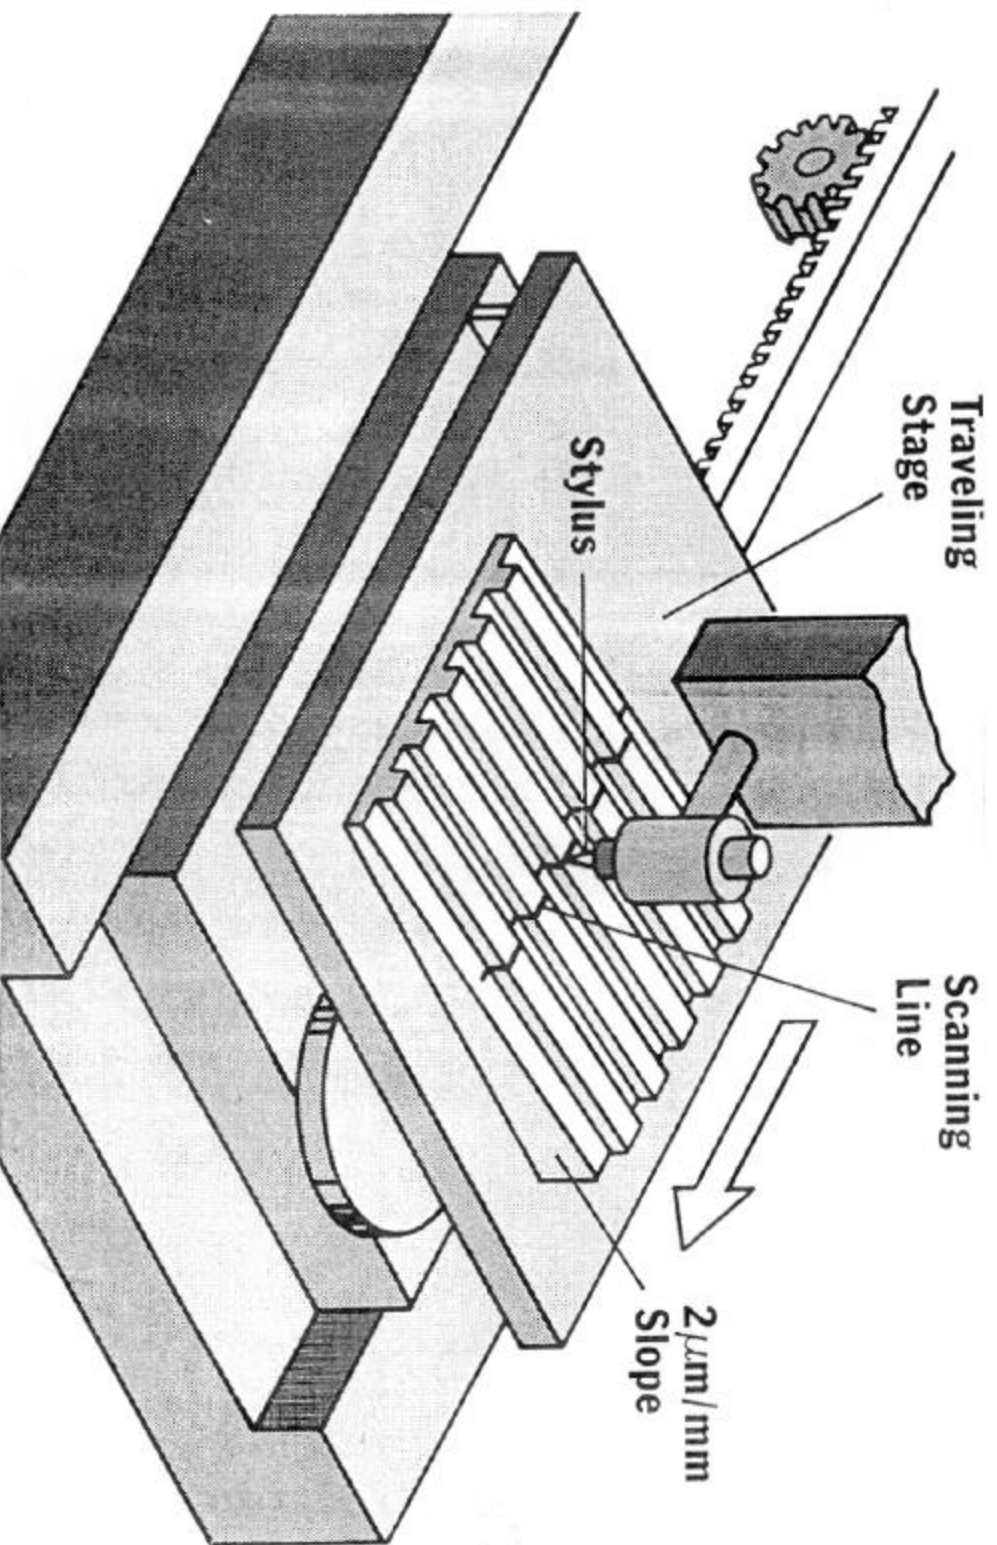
Schematic drawing of a surface profilometer. Courtesy of Sloan Technology Corporation
